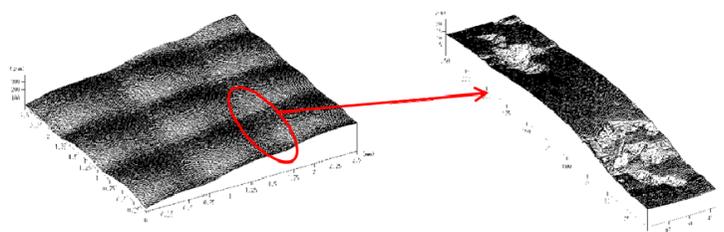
Surface profile in the bottom of the “Shibo” pattern’s ditch measured with a laser displacement gauge.
